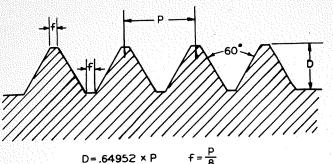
Metric Standard Screw Thread Form and Formulas.
